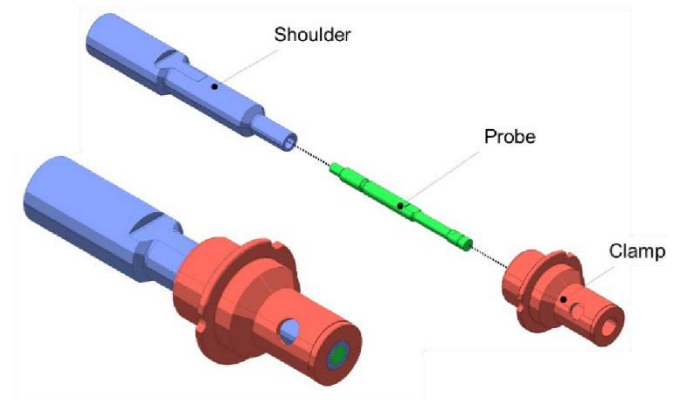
The three different pieces of a RFSSW tools set: the shoulder, probe, and clamp.
